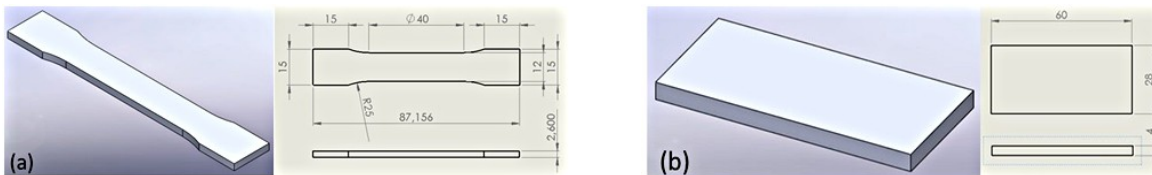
(a) Tensile test specimen, (b) three-point bending test specimen
